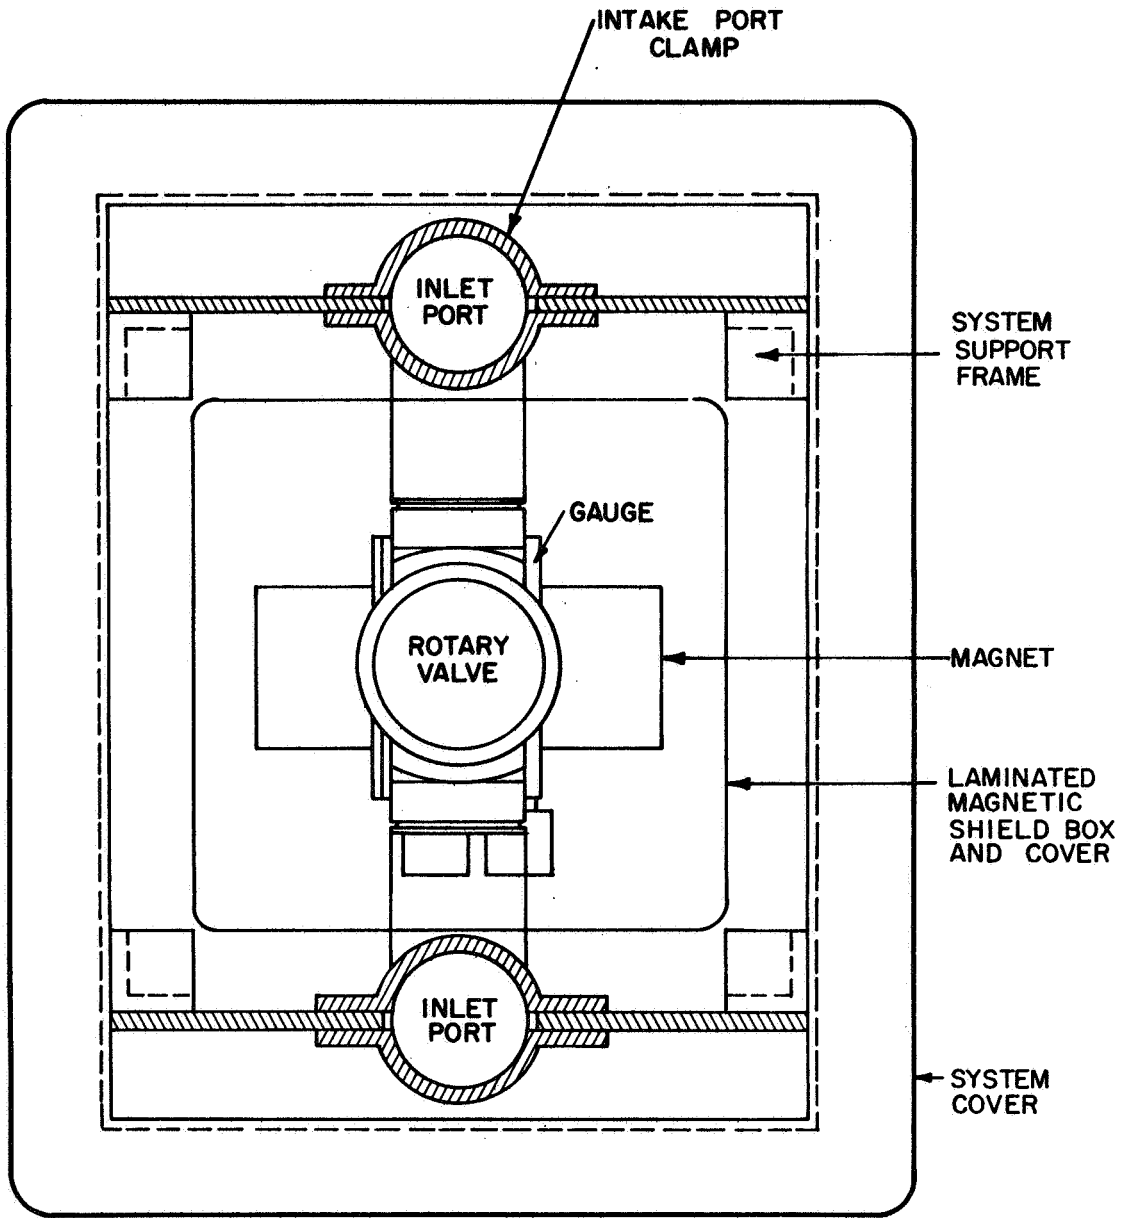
Top view of rotary valve and flexure-pivot valve version of yaw attitude sensor package.
